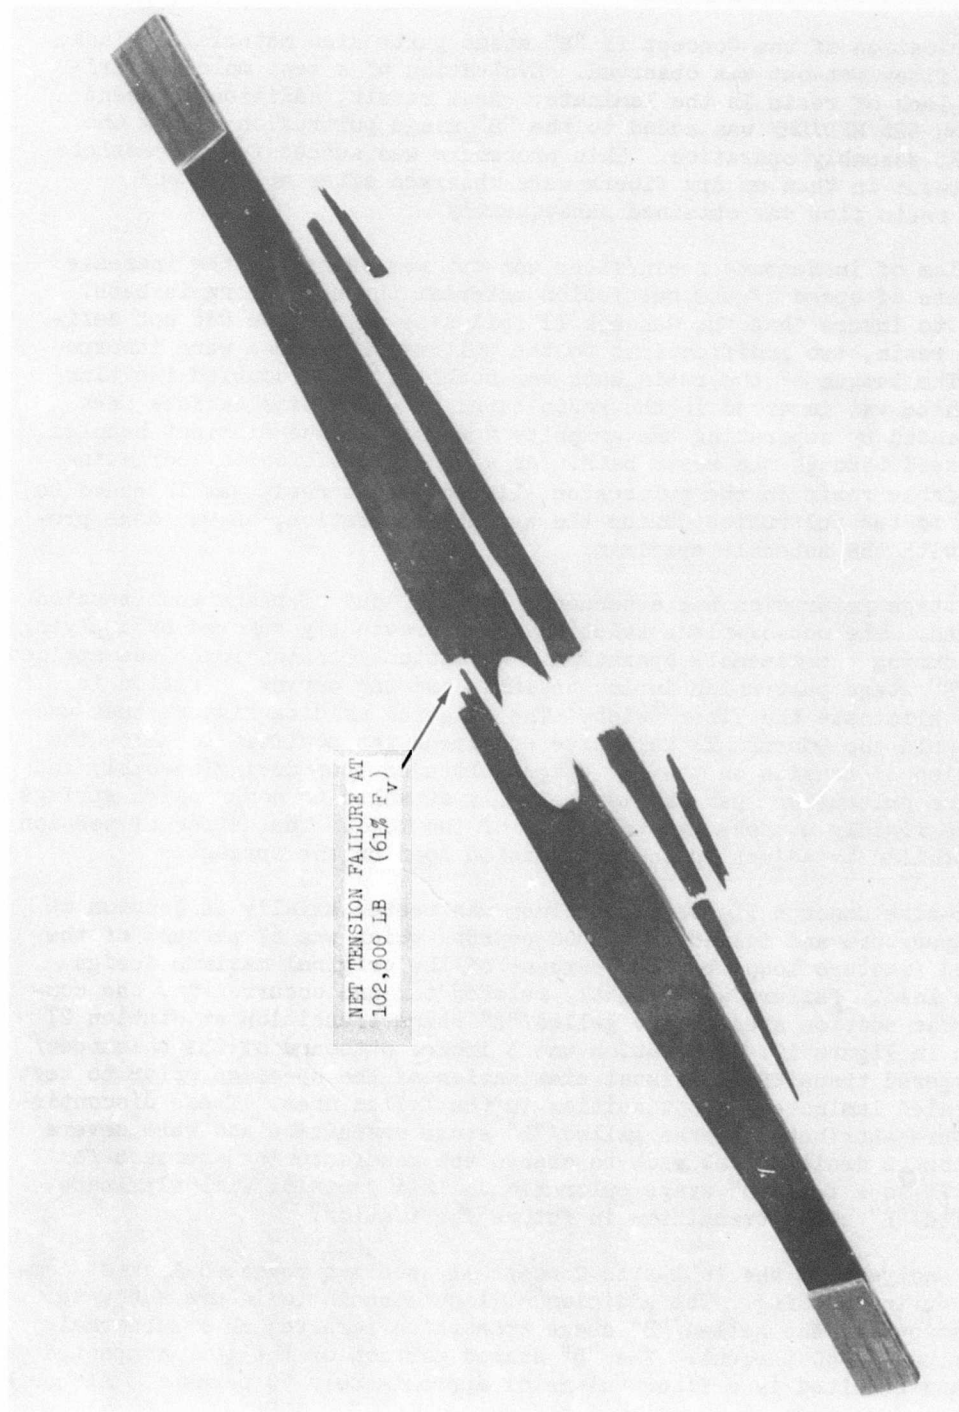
Concept I - Full-Size Static Specimen Showing Location of Fracture Through Hub Attachment Hole.
